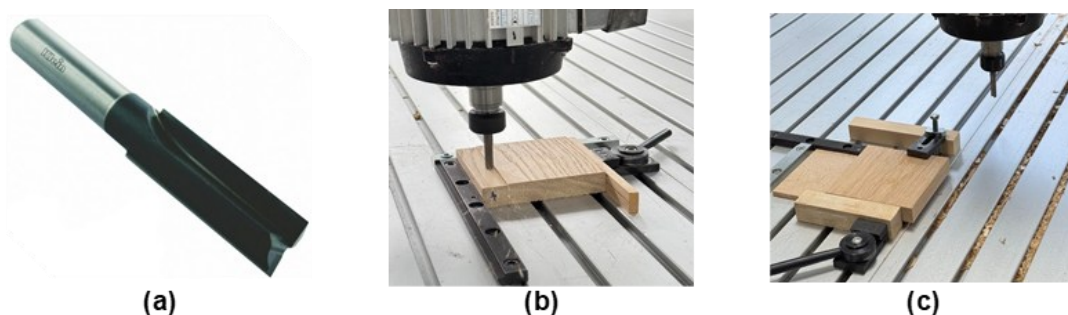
Machining on CNC: (a) straight flute end mill, (b) face/frontal milling, (c) edge/peripheral milling
